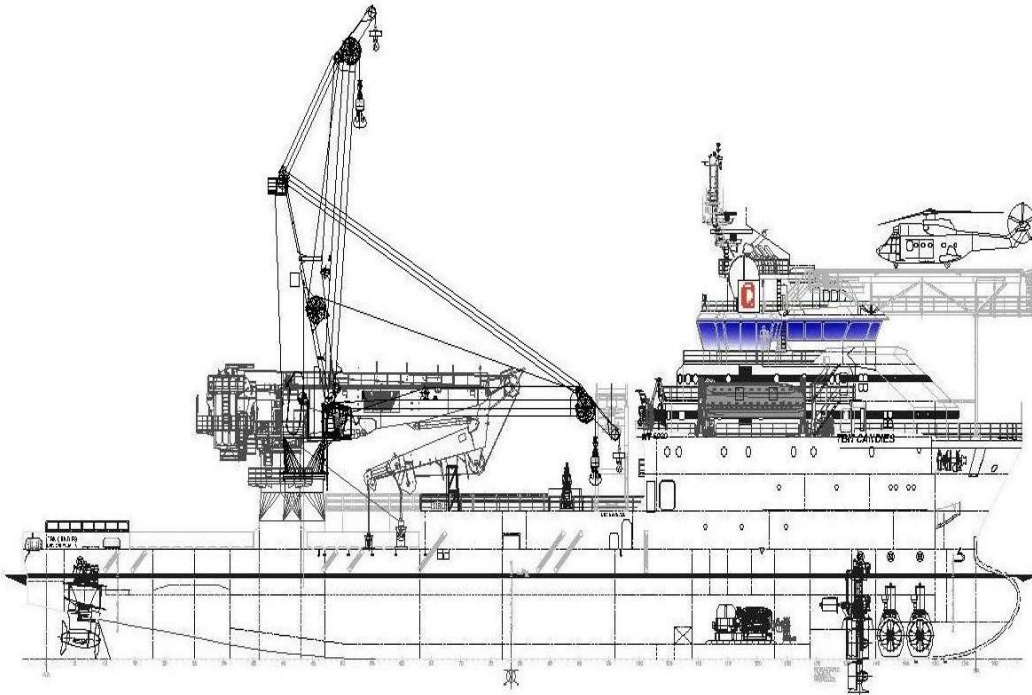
Section Drawing of the ship MT 6020-2290 source Marin Teknisk Poland
